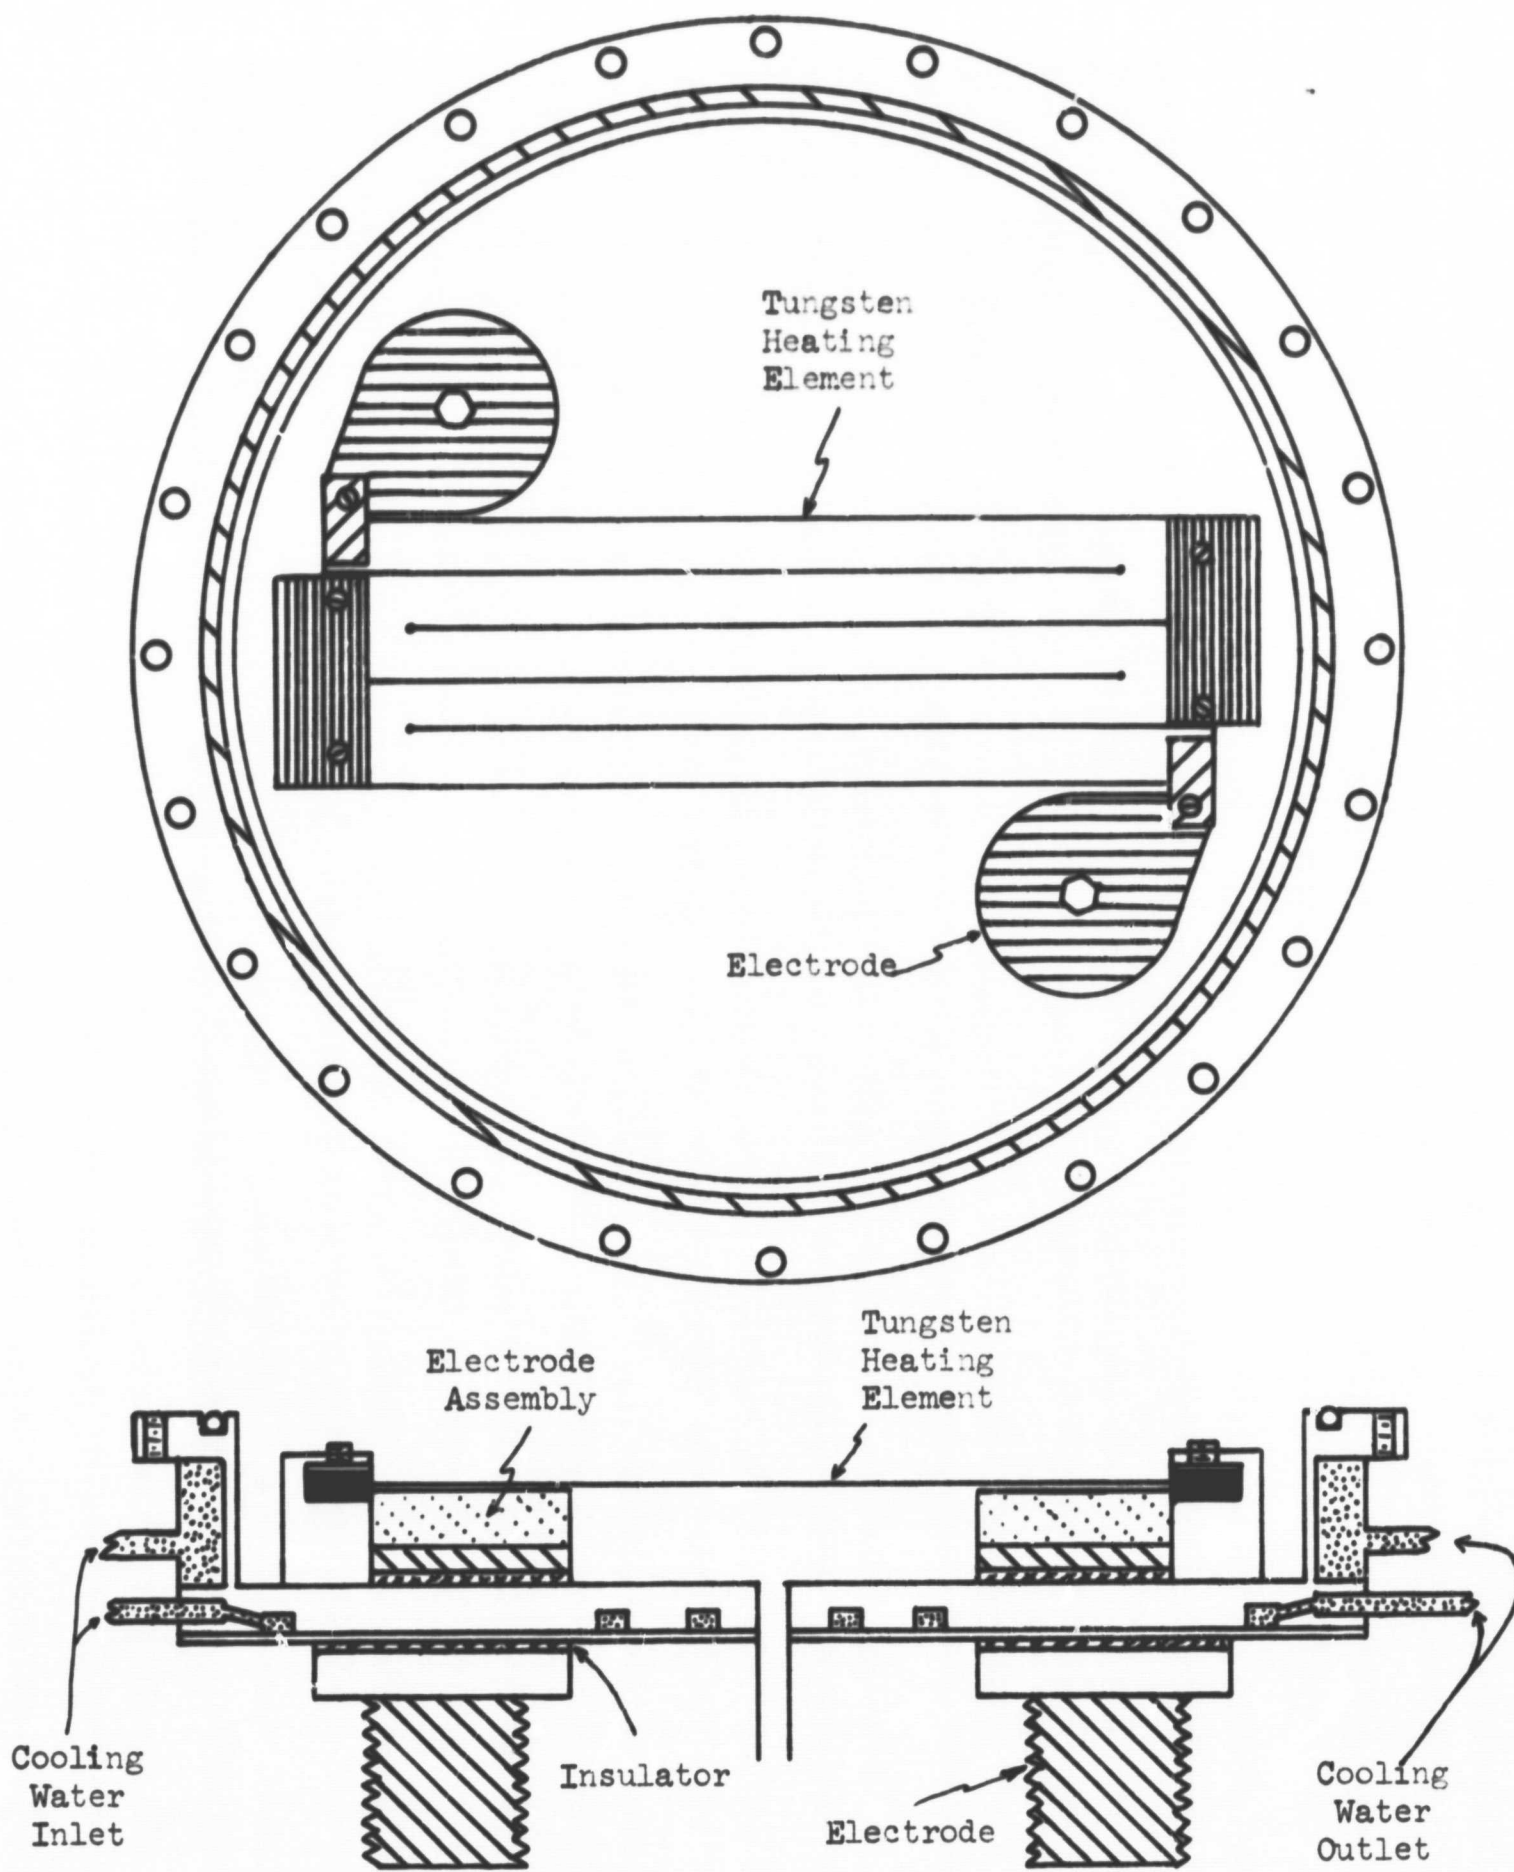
Front and Side Views of the Radiant Heater with Top Removed.
